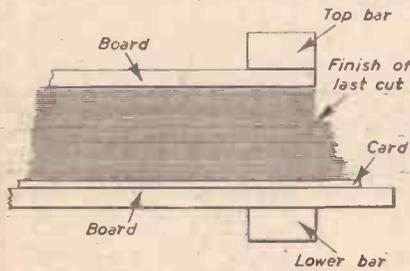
Book between boards in clamps, showing the edge partly cut.
